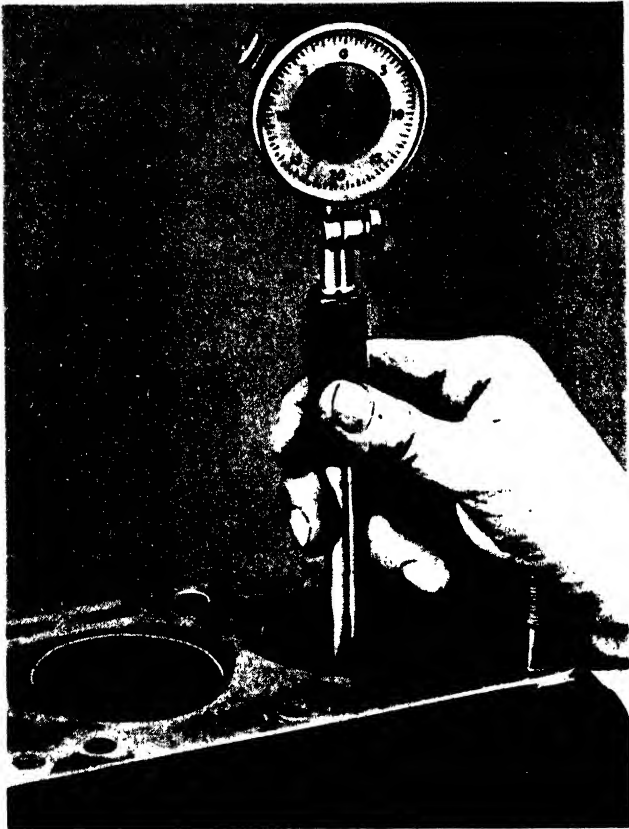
POPULAR TYPE OF CYLINDER GAUGE
